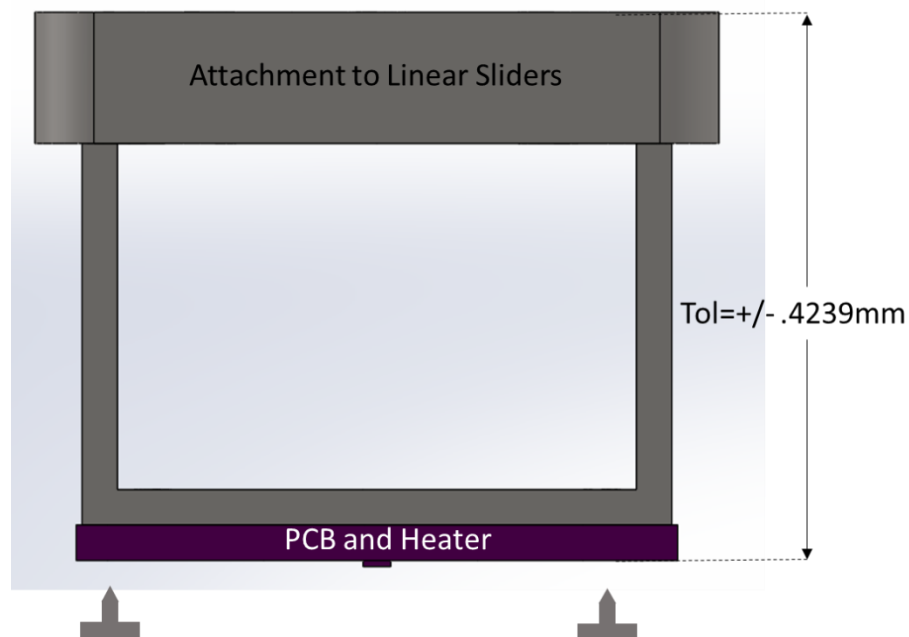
Tolerance for Final Assembly of Critical Parts
